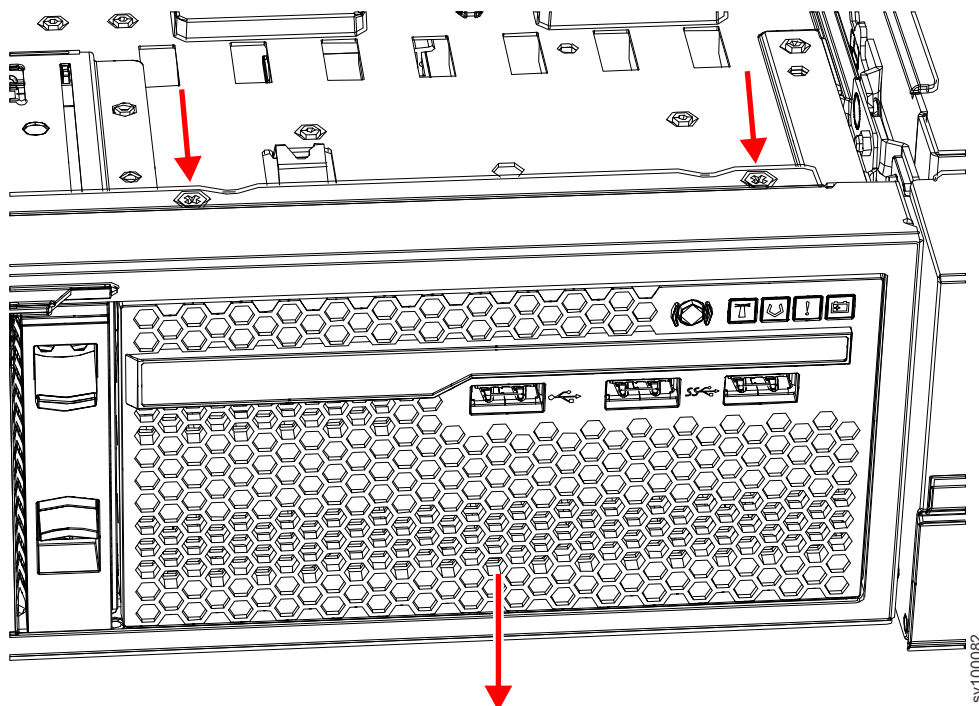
Removing the 2145-SV1 operator-information panel assembly
